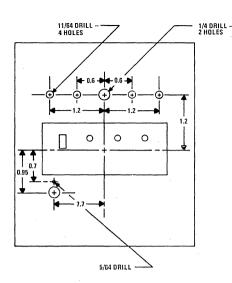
Drilling Guide for the Case Top if the MRC-1-10 Rotary Function Switch is Used. (Dimensions in inches.)
